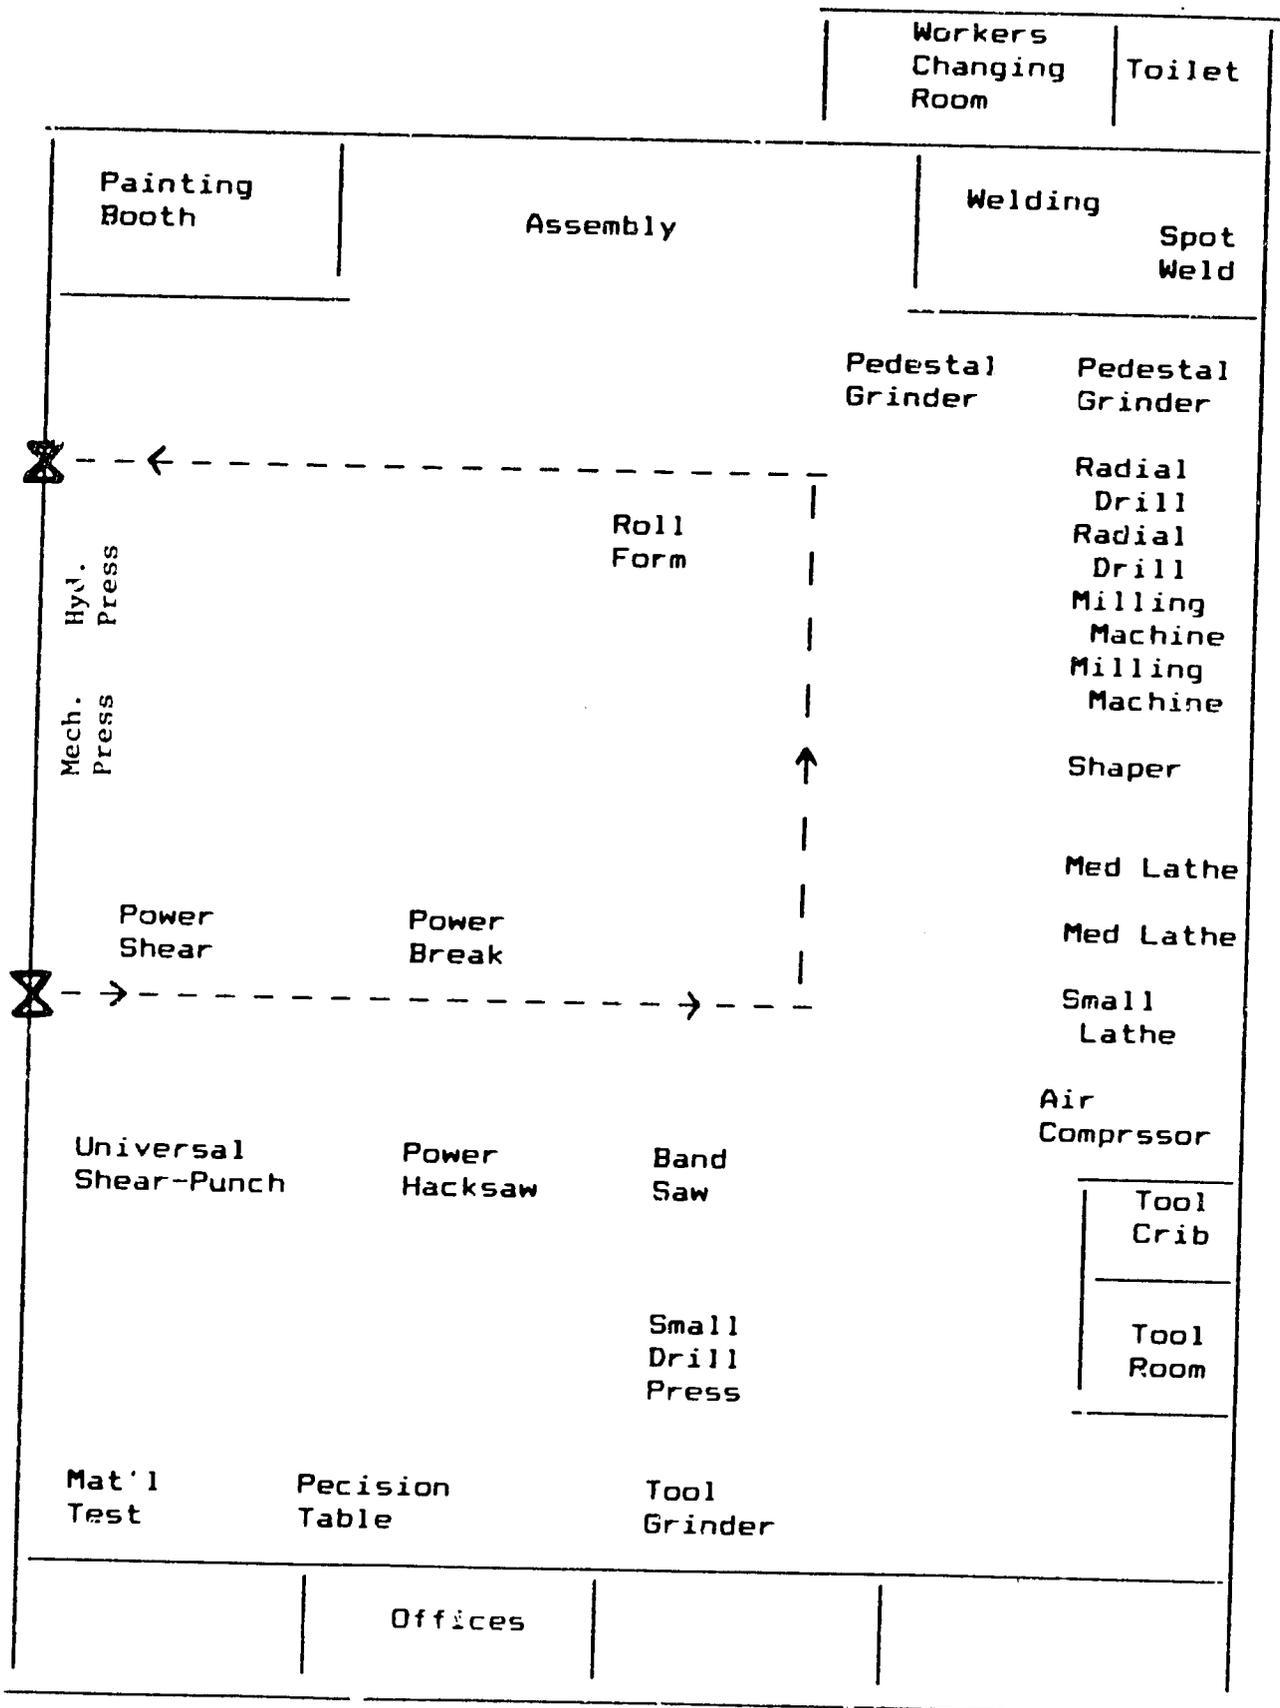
FEMTC BUILDING AND EQUIPMENT PLAN
